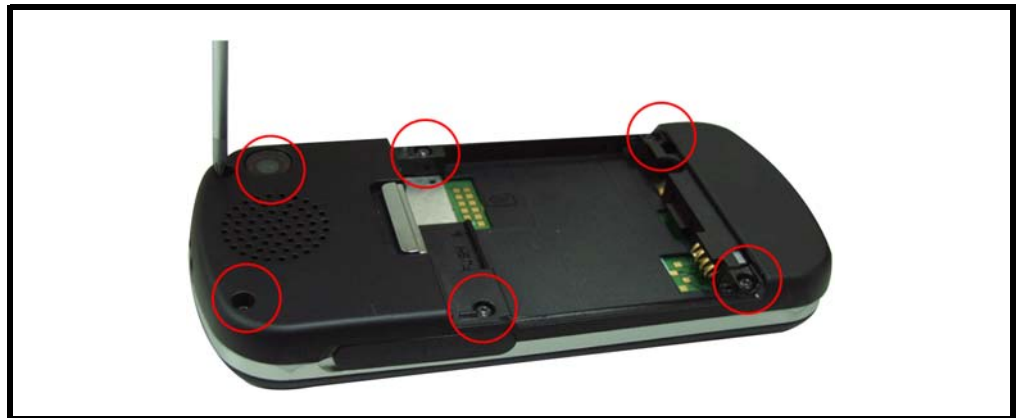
Removing 6 T5 screws (Torque Force = 1.2 kgf-cm)
